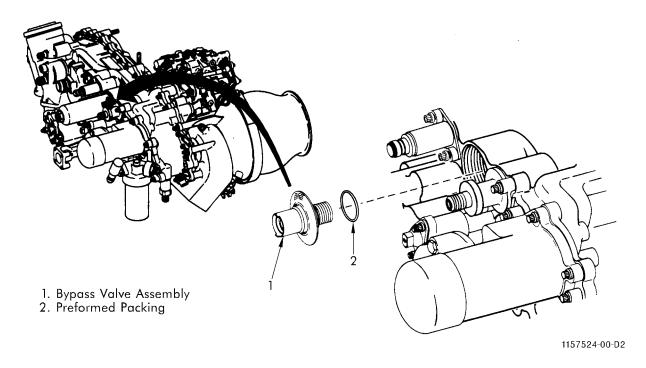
Bypass Valve Assembly; Removal and Installation
